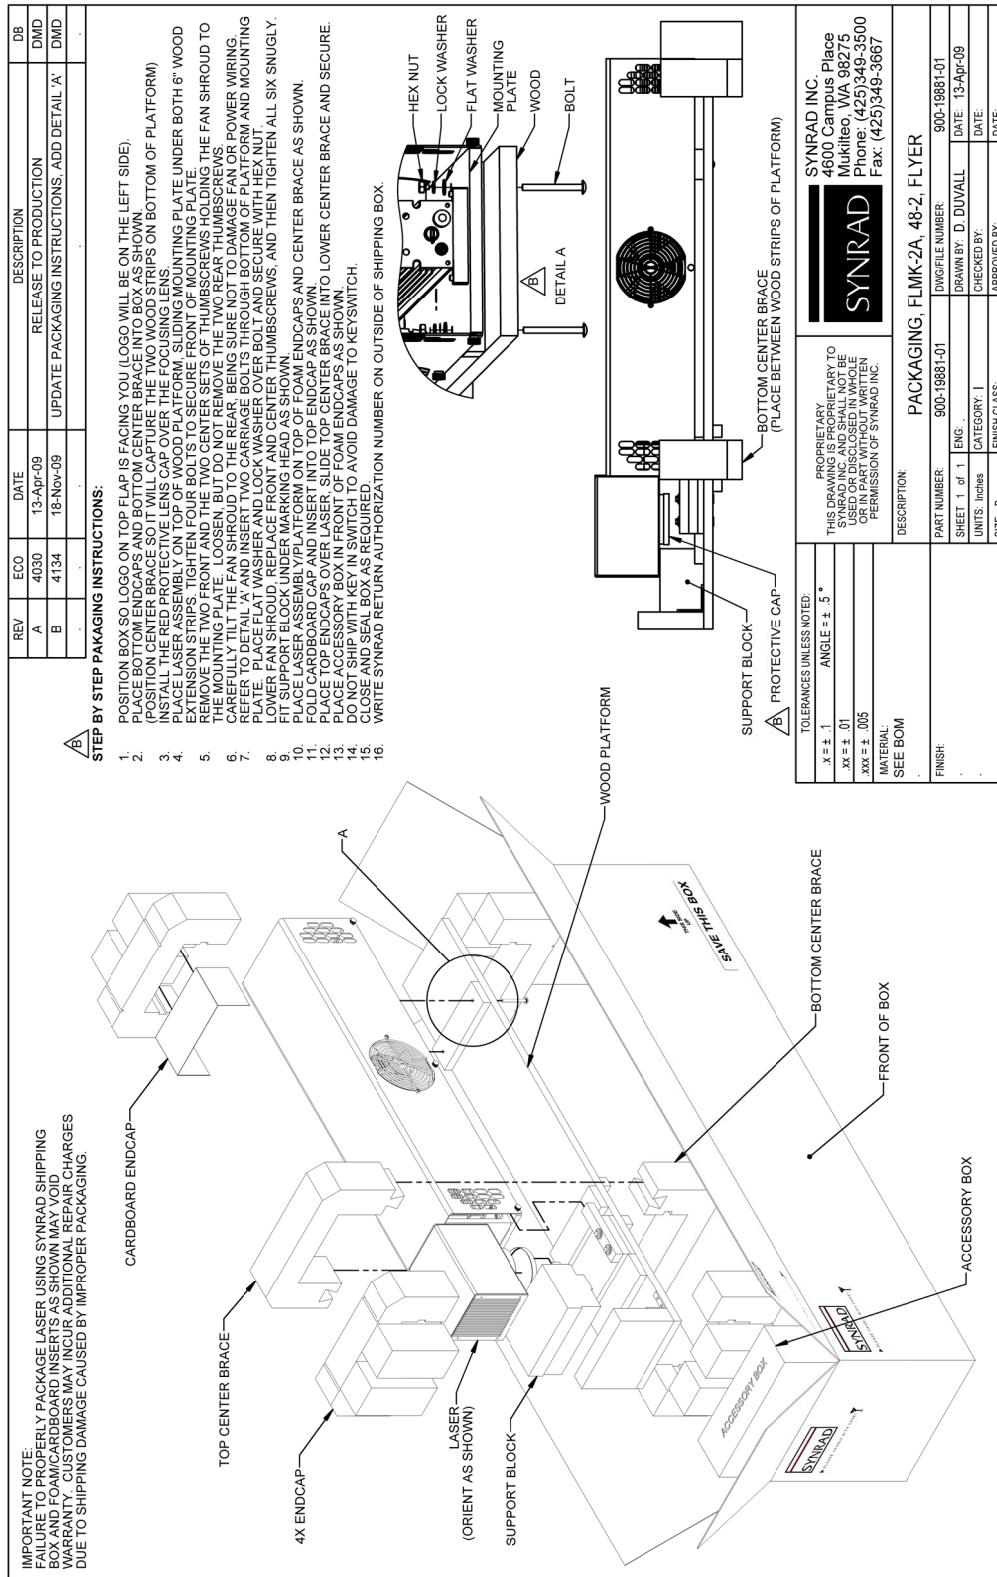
FLMK-2A (25W fan shroud) packaging instructions.
